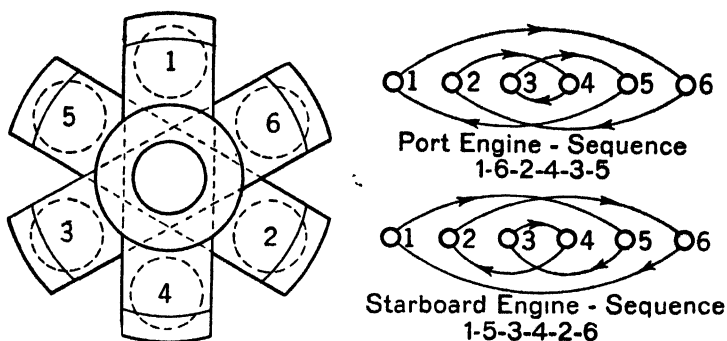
Arrangement of Cranks and Firing Sequence of Six-Cylinder, 2-Cycle Marine Engine Crankshaft
